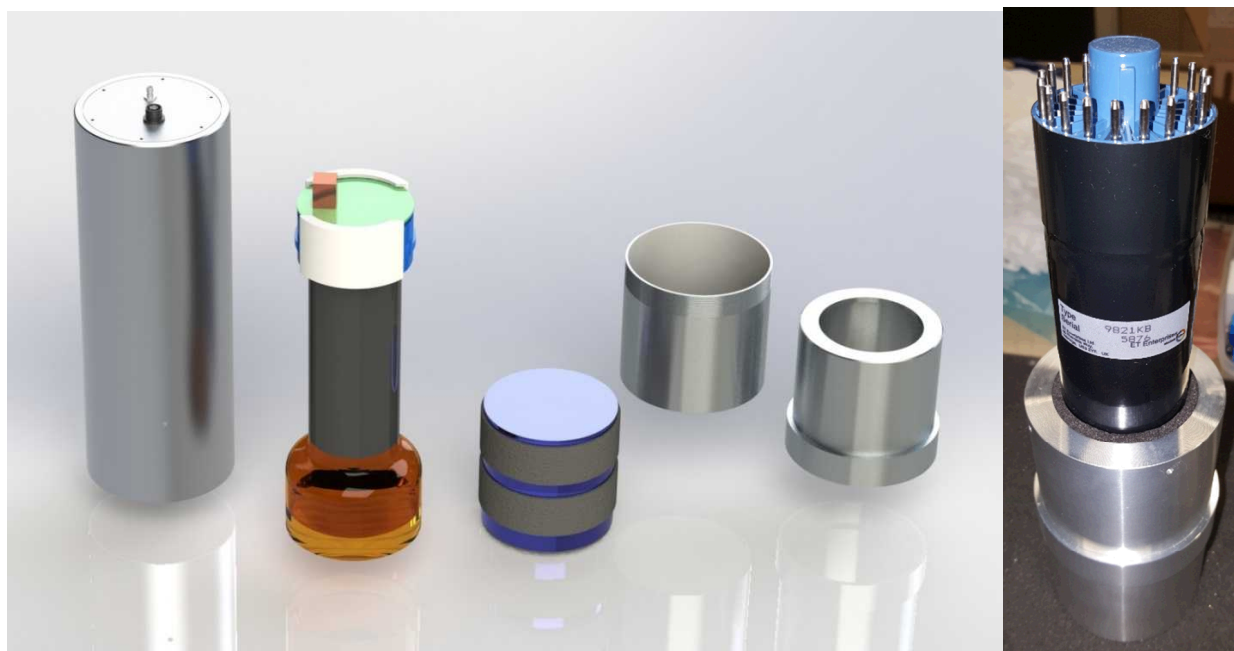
Left: CAD diagram of cell components. Right: partially assembled cell.
